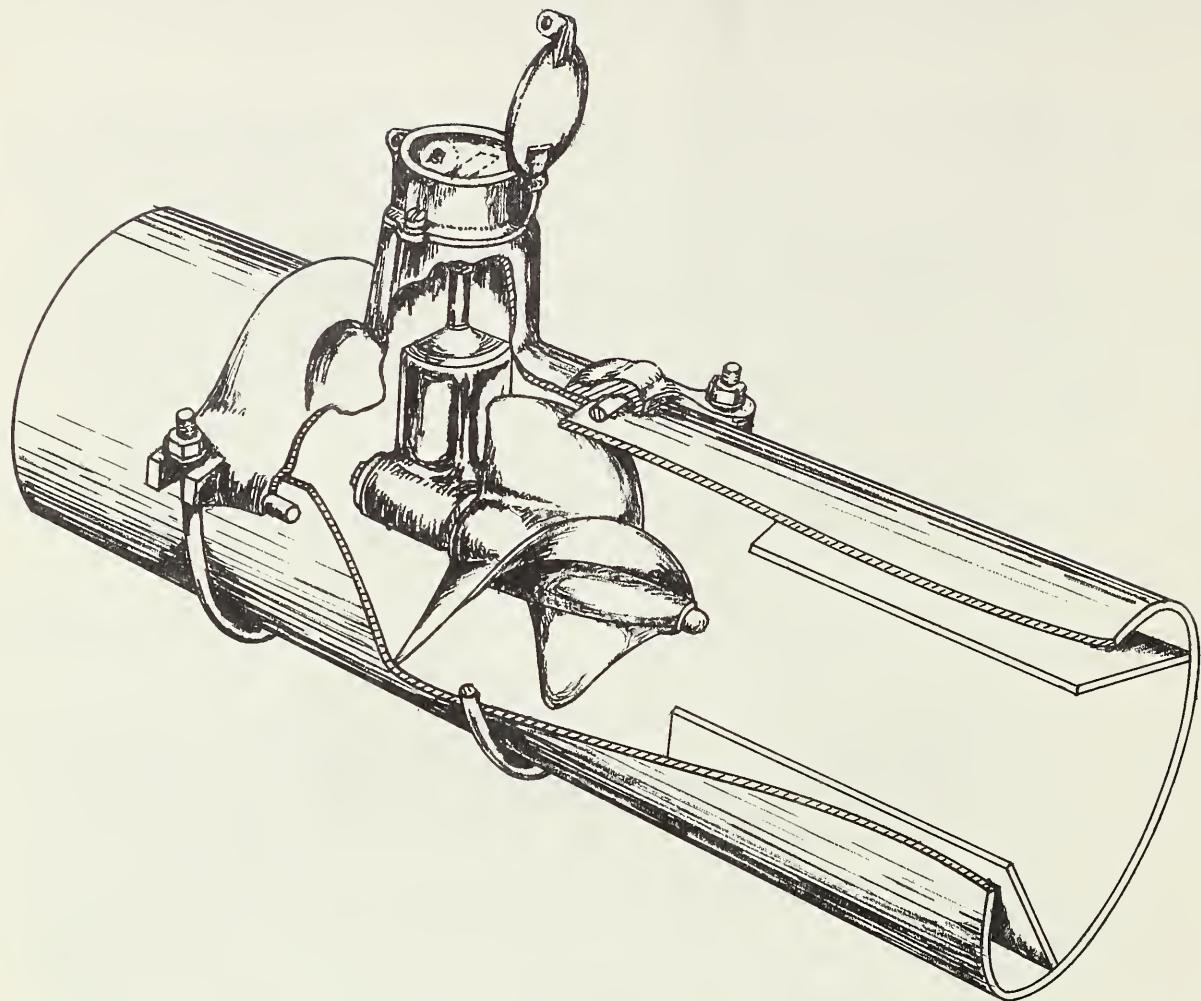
A low-pressure line meter installed in a section of steel pipe
